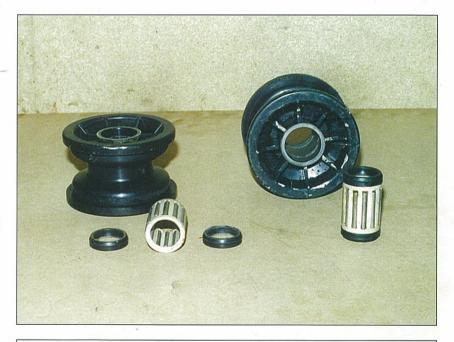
The front wheels and needle-roller bearings used on Derek Manders's Buggy. (Derek Manders)
